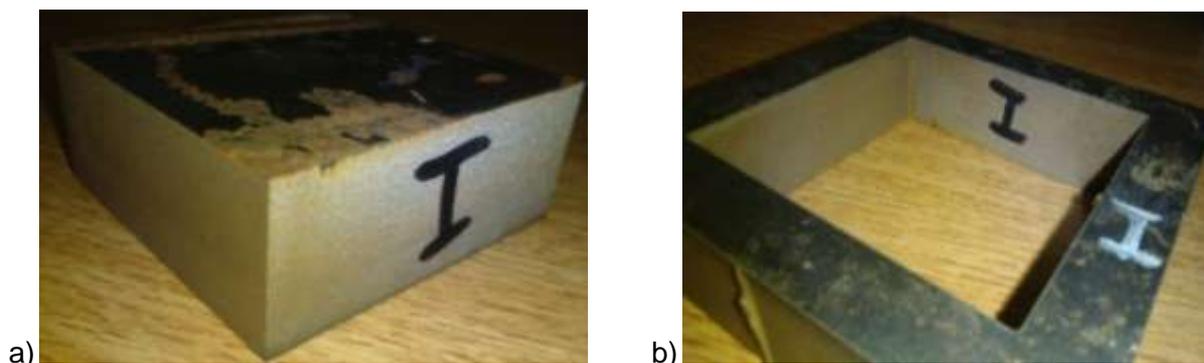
a) Interior of the cutted part, b) Exterior of the cutted part
